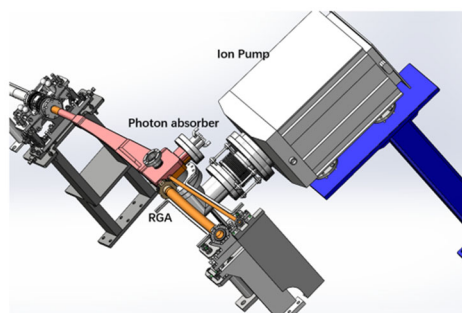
Model of vacuum chamber (Super Bend composite magnet).
